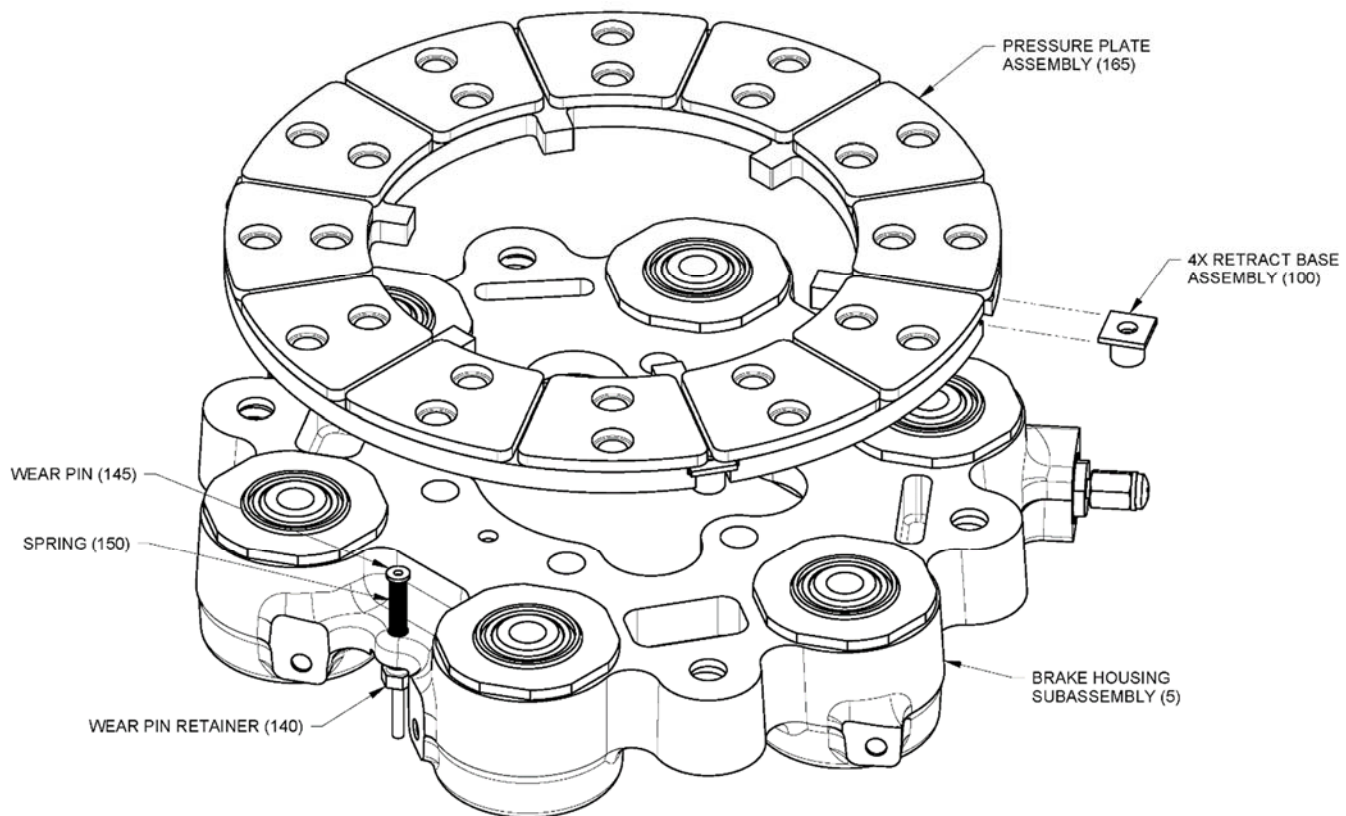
Remove retract base assemblies (100) and wear indicator components (140), (145), (150)
